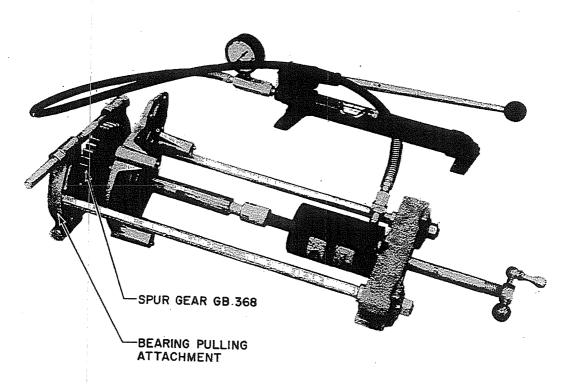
1 to 1 Shaft, Installation of Spur Gear GB368
